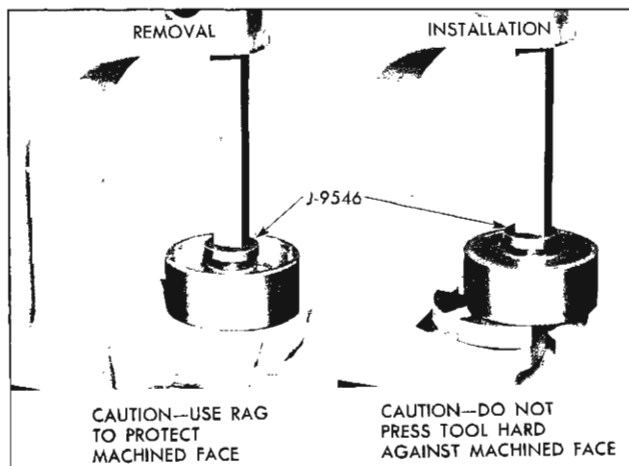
PG—Removing and Installing Clutch Drum Bushing
